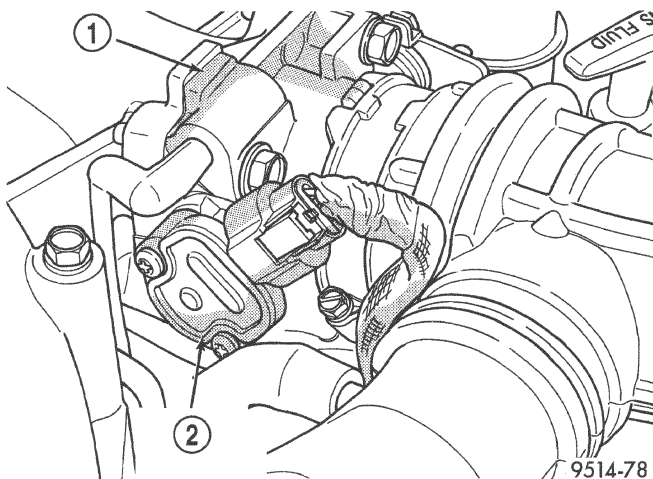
Intake Manifold Sensors and Left Manifold Support Bolt
